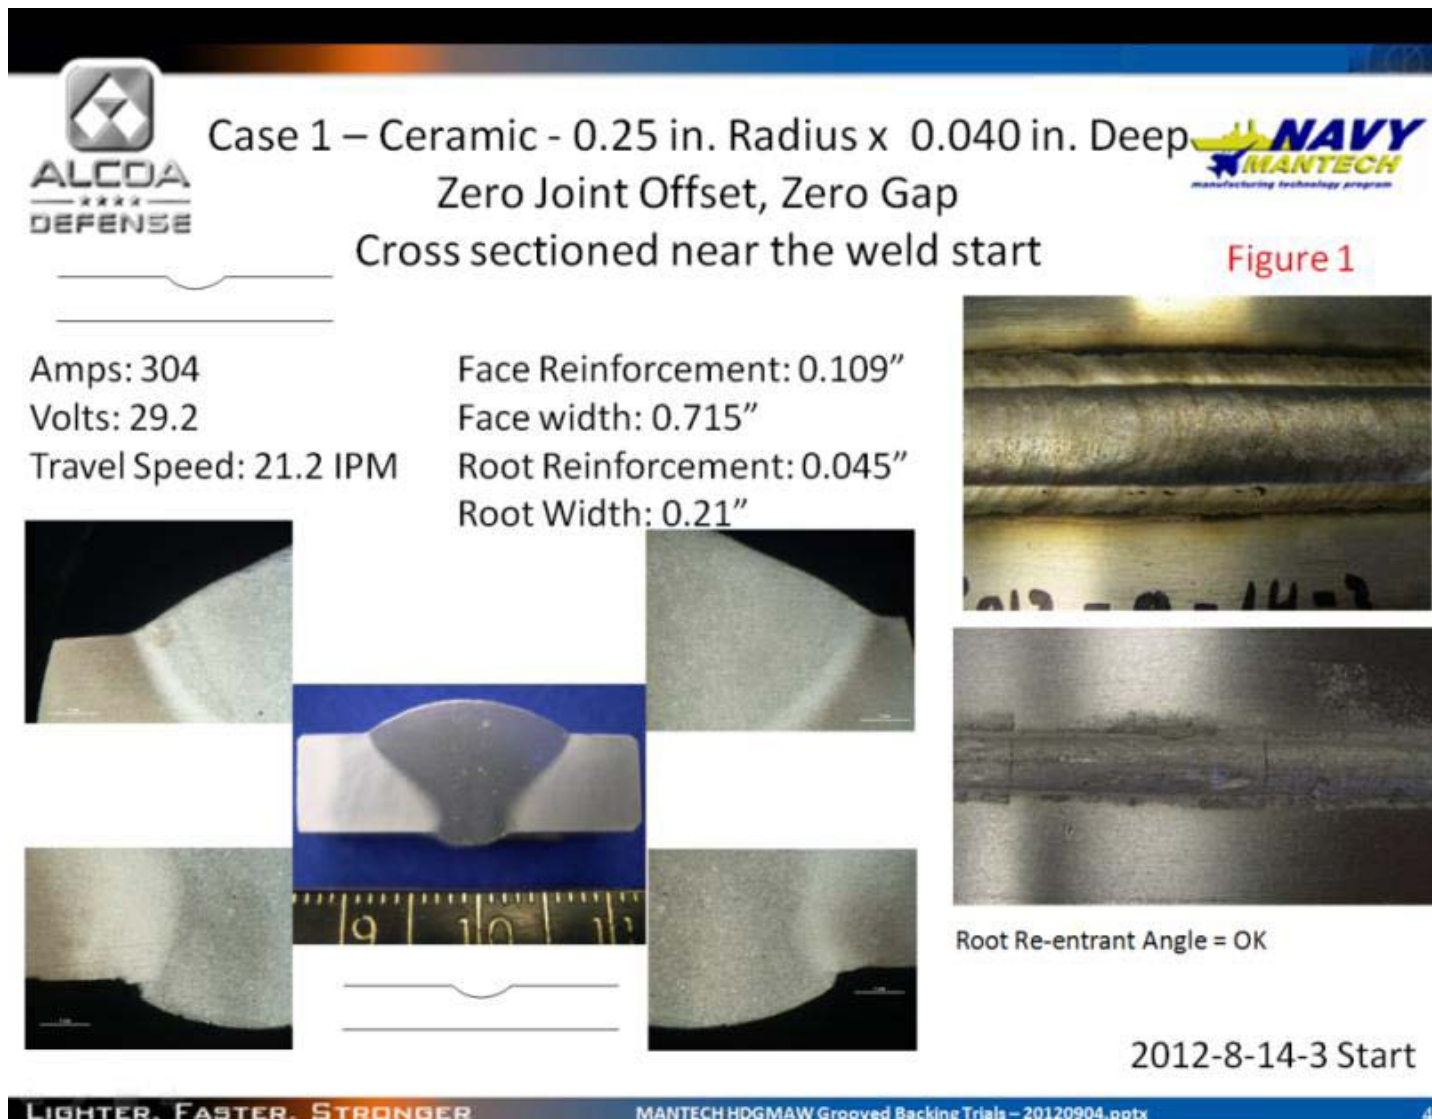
Case 1 – Ceramic – 0.25 in. Radius x 0.040 in. Deep Zero Joint Offset, Zero Gap Cross sectioned near the weld start
